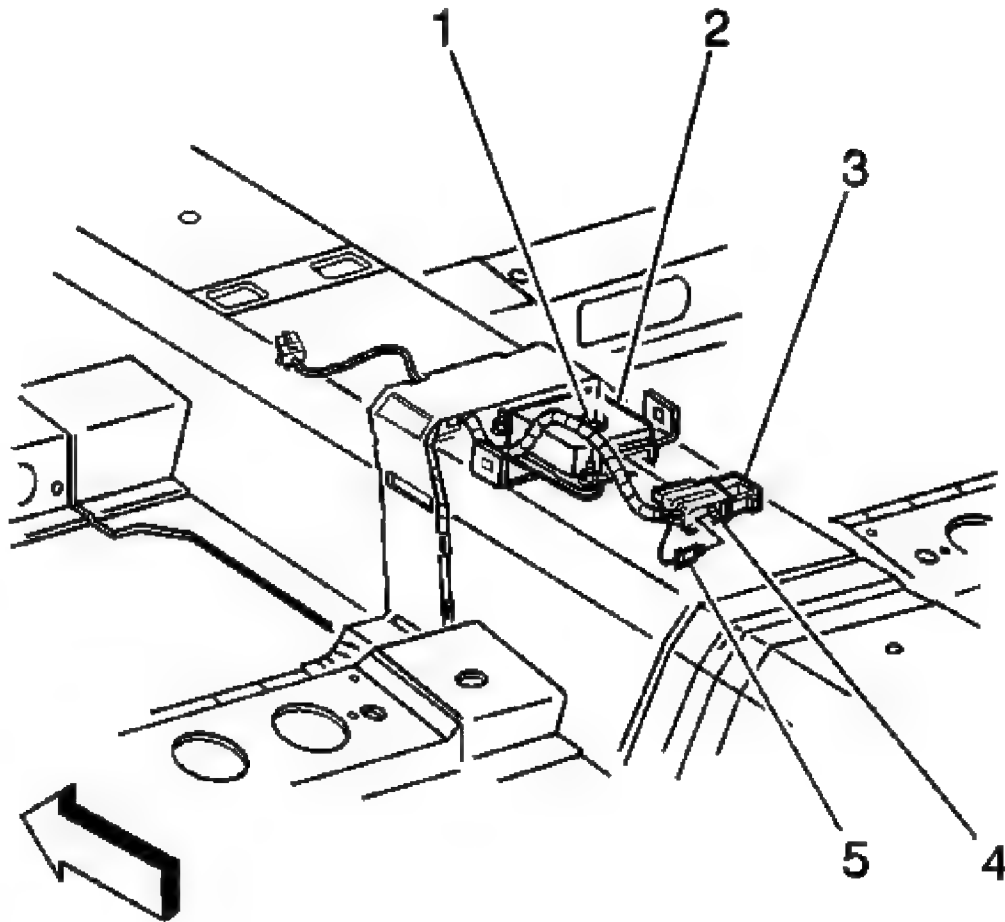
View of DM Wiring Harness Connector, SDM & Push-On Clip
